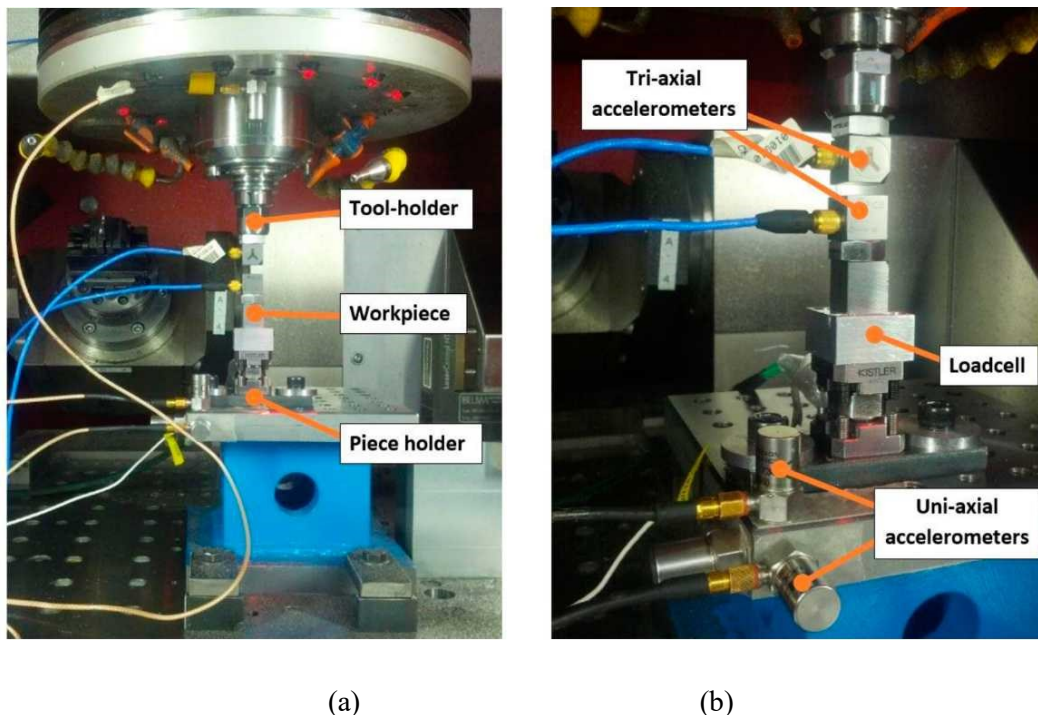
Test setup: (a) workspace area with the tool holder and the piece holder; and (b) the load cell and the piezo accelerometers.
